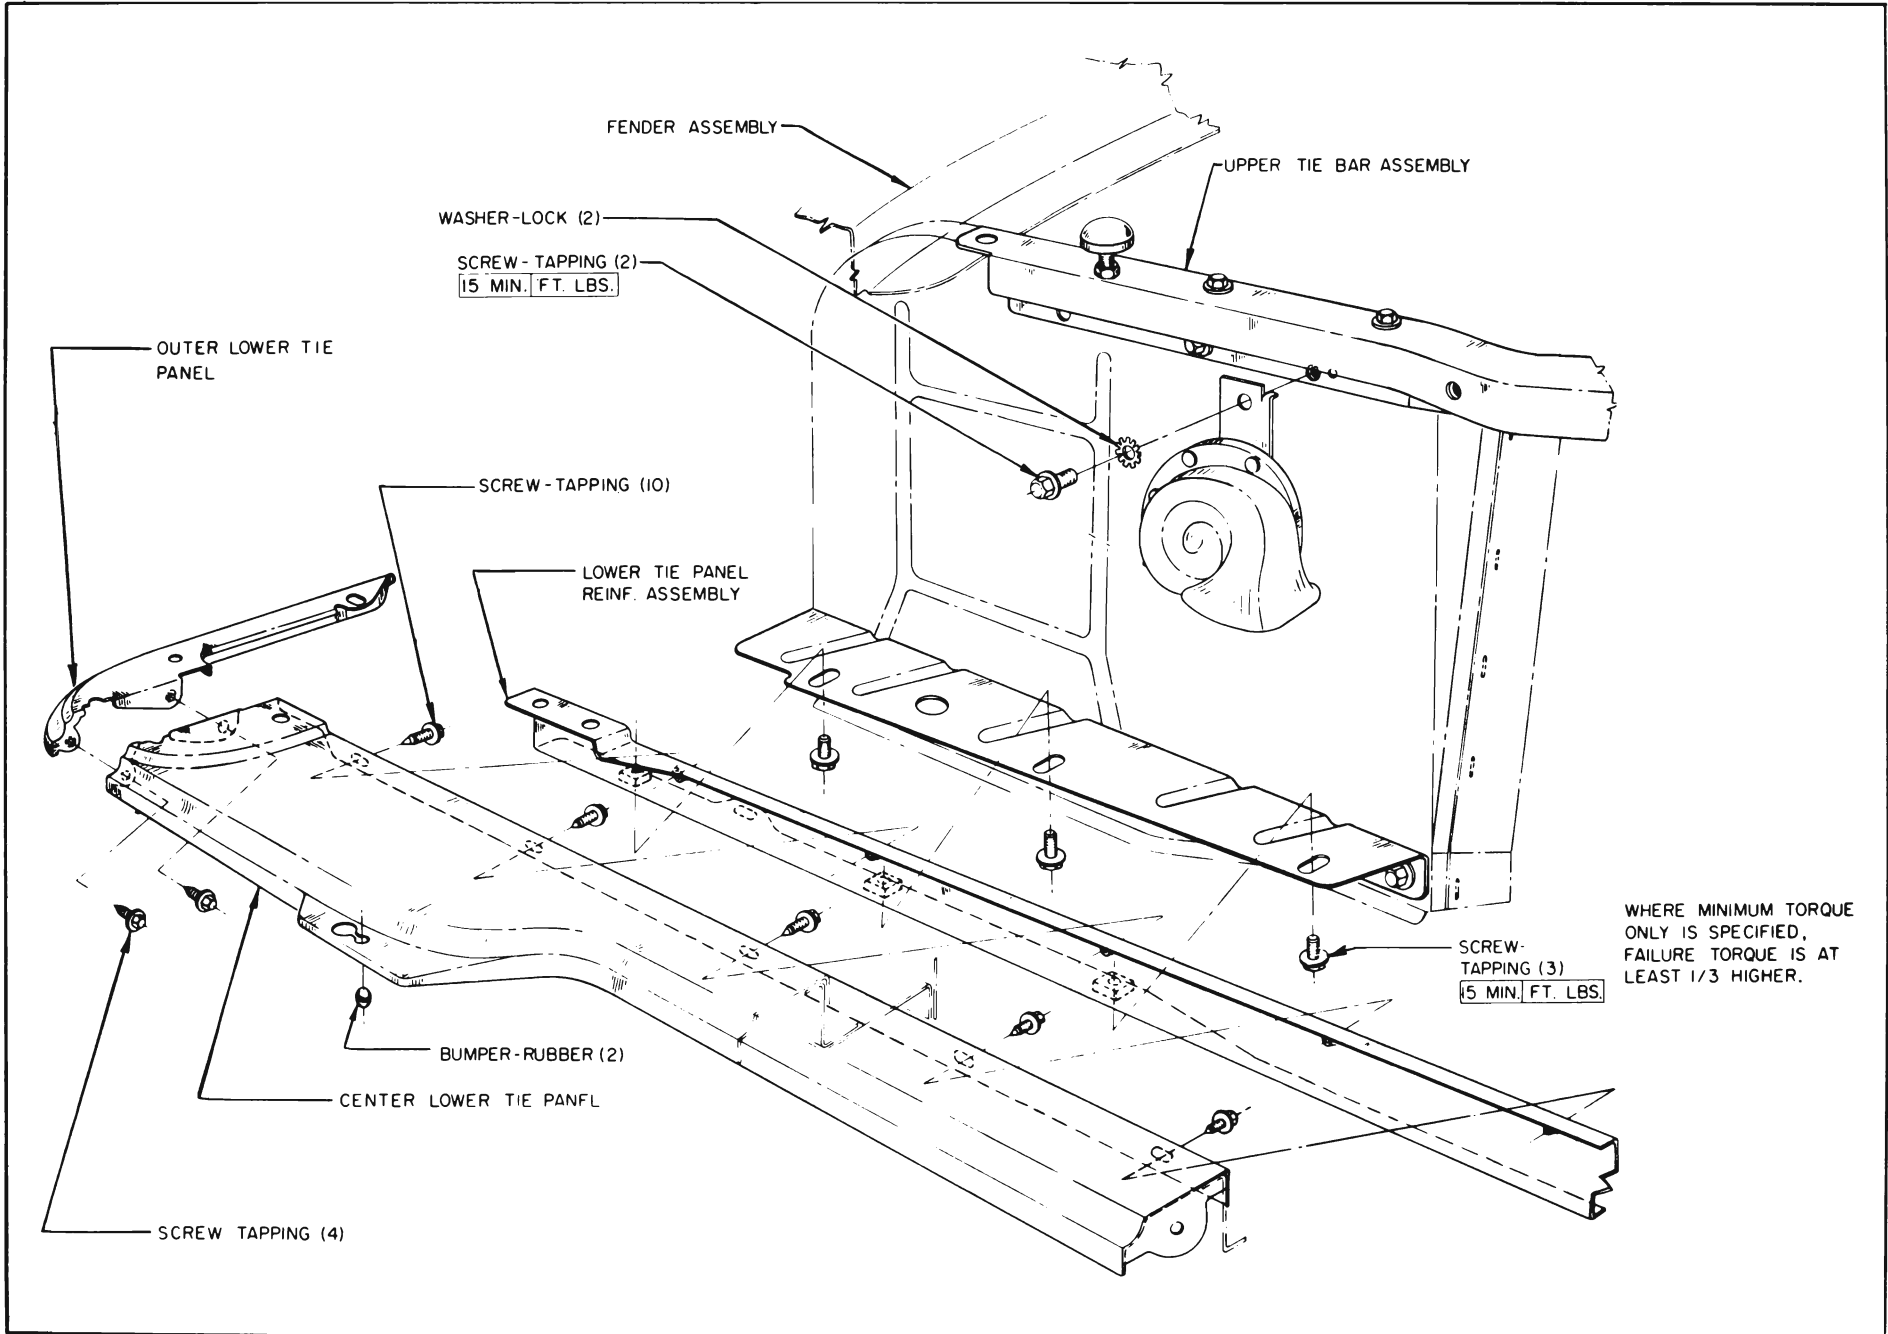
Grille and Front End Sheet Metal Illustration #4
